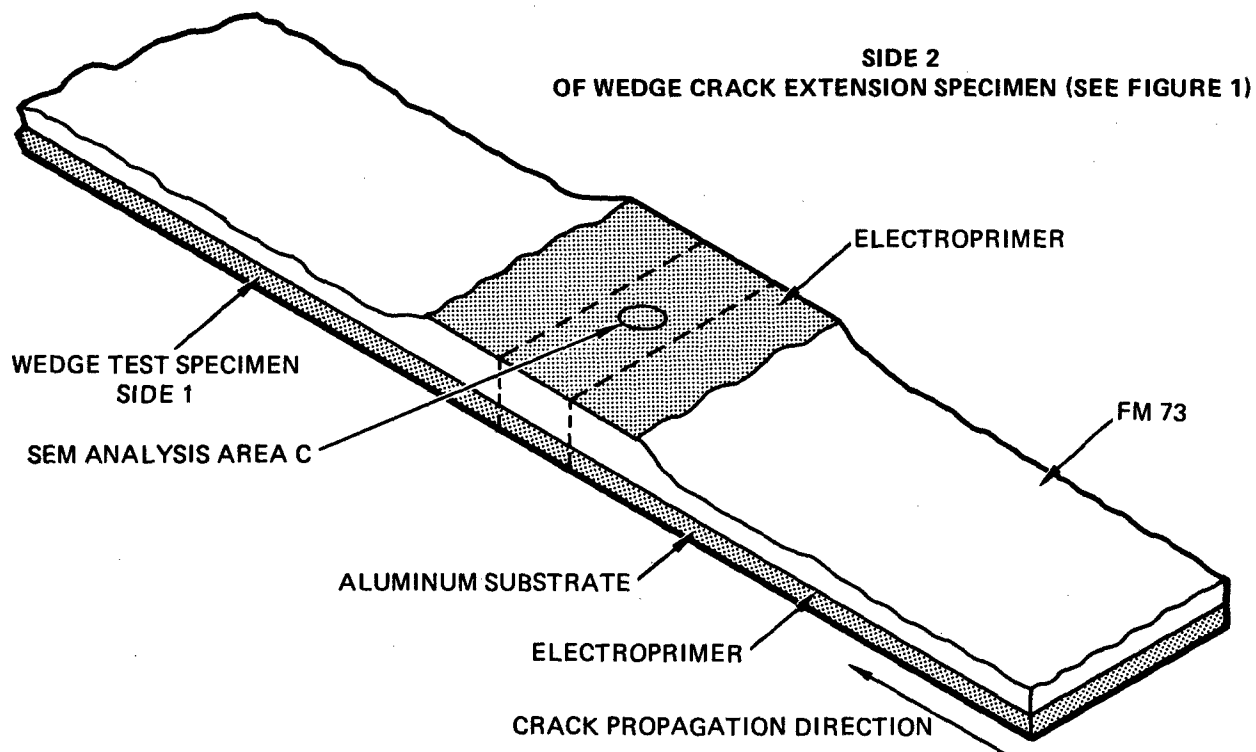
Detail of Area C, Side 2, Wedge Crack Extension Specimen
